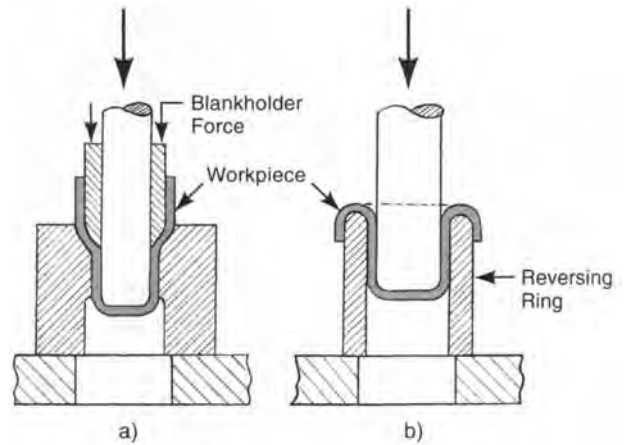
D5c Redrawing a drawn part: a) direct redrawing, b) reverse redrawing.
